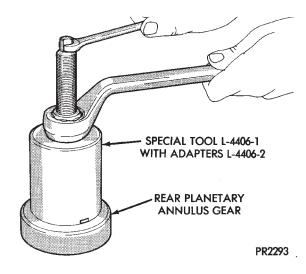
Remove Rear Planetary Annulus Gear Bearing Cone
